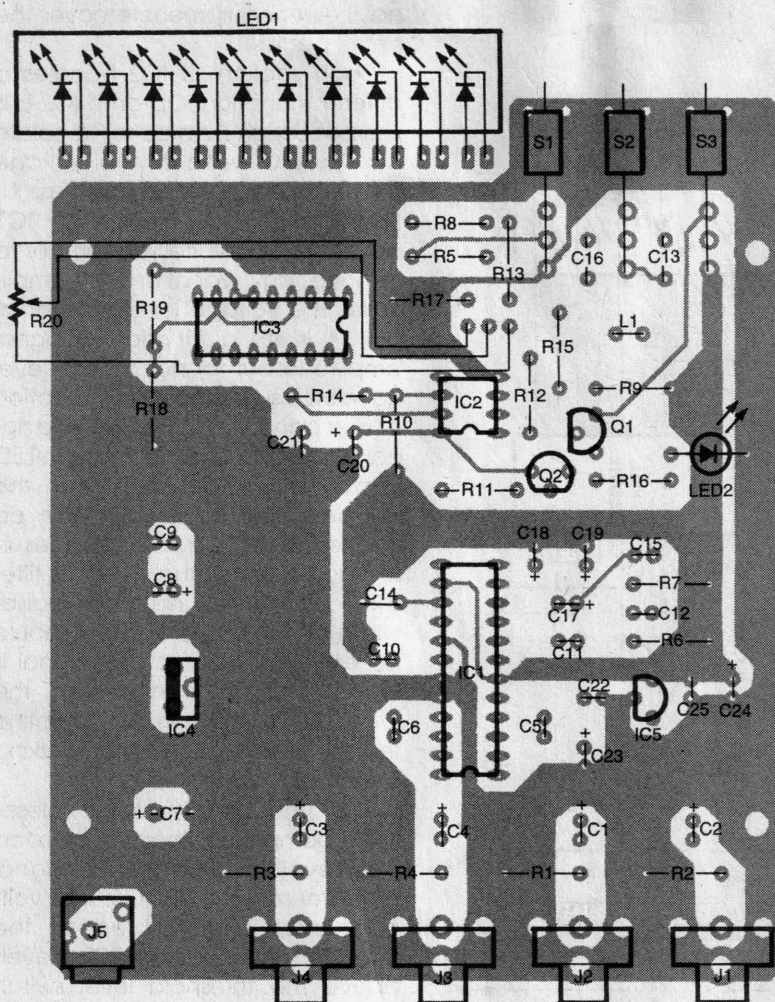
The Universal Noise Reducer uses a double-sided PC board. If your board doesn't have plated-through holes, don't forget to solder the traces where pads are on both sides of the board. No jumpers are needed; all connections between sides are made at component leads.
